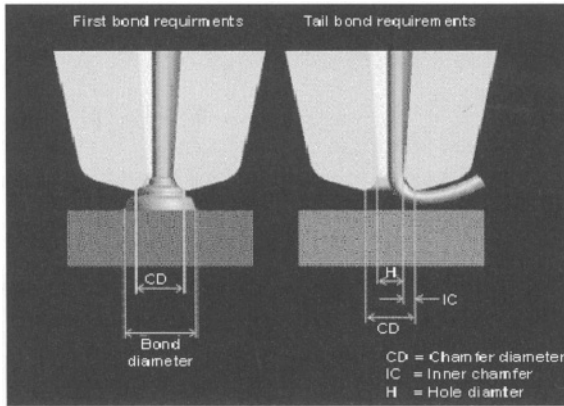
Capillary design consideration (Determining chamfer diameter and chamfer angle) [P-11]
